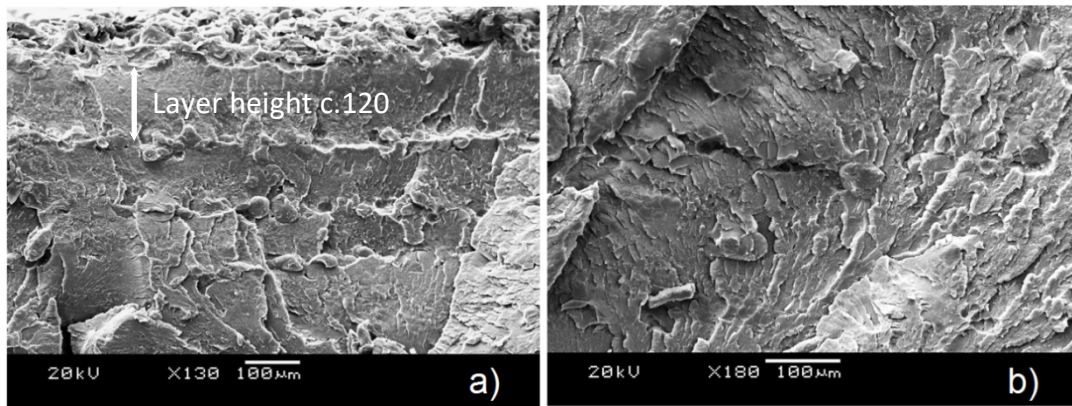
flexural failure; a) progressive fracture of layers b) fast fracture
